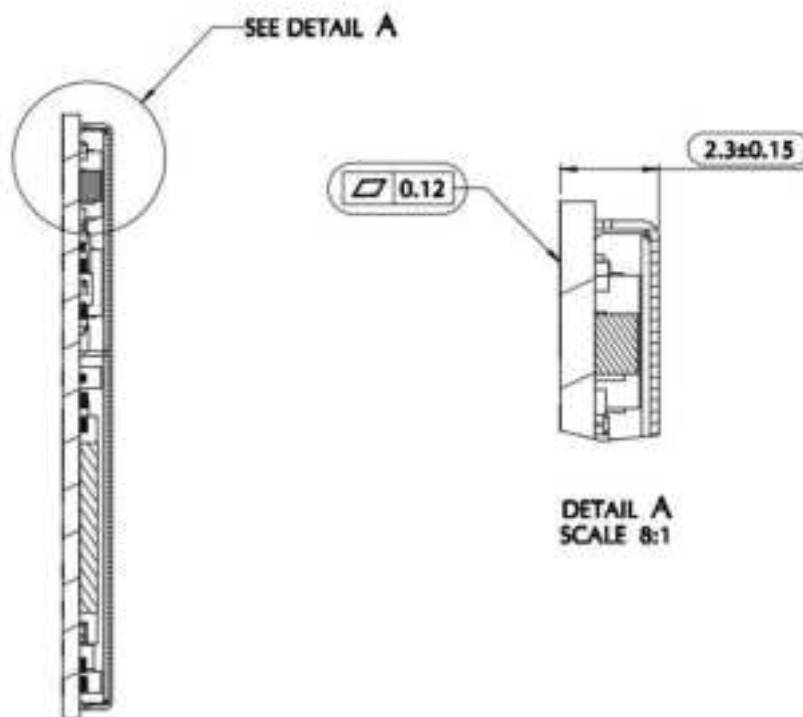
LE910C1-SV and SVX Mechanical Dimensions (Side view)
